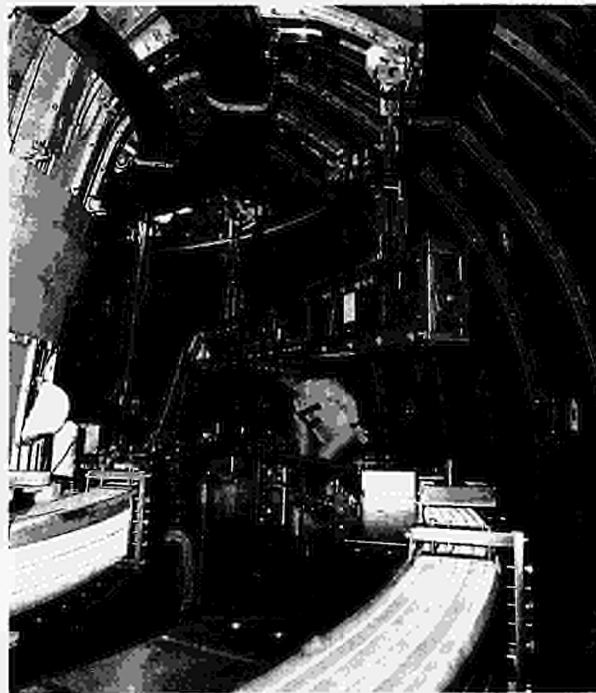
Motorised lifting beam used during the manufacturing process of the divertor coils inside the JET vacuum vessel
